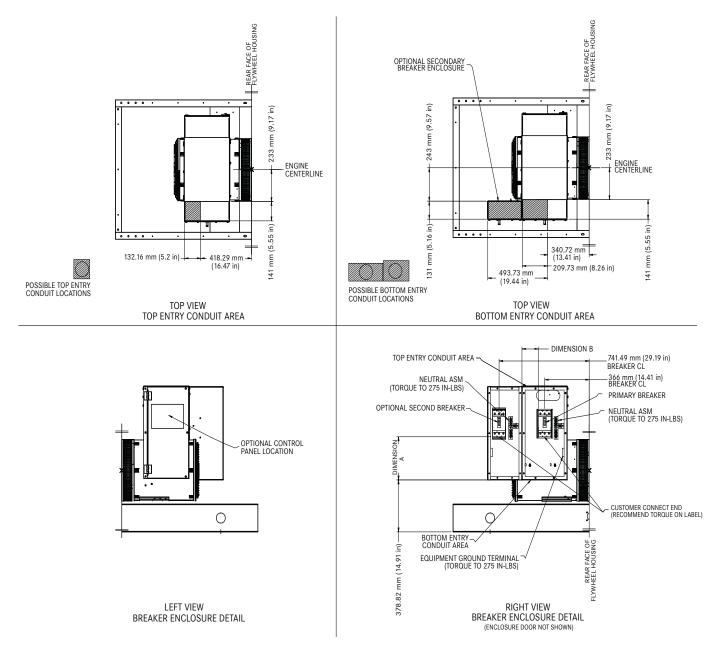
360 Frame Enclosure (Drawing ID: XZG2500100031)
